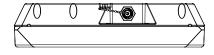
SR 150, 250 & 500 radar sensor outline drawing
